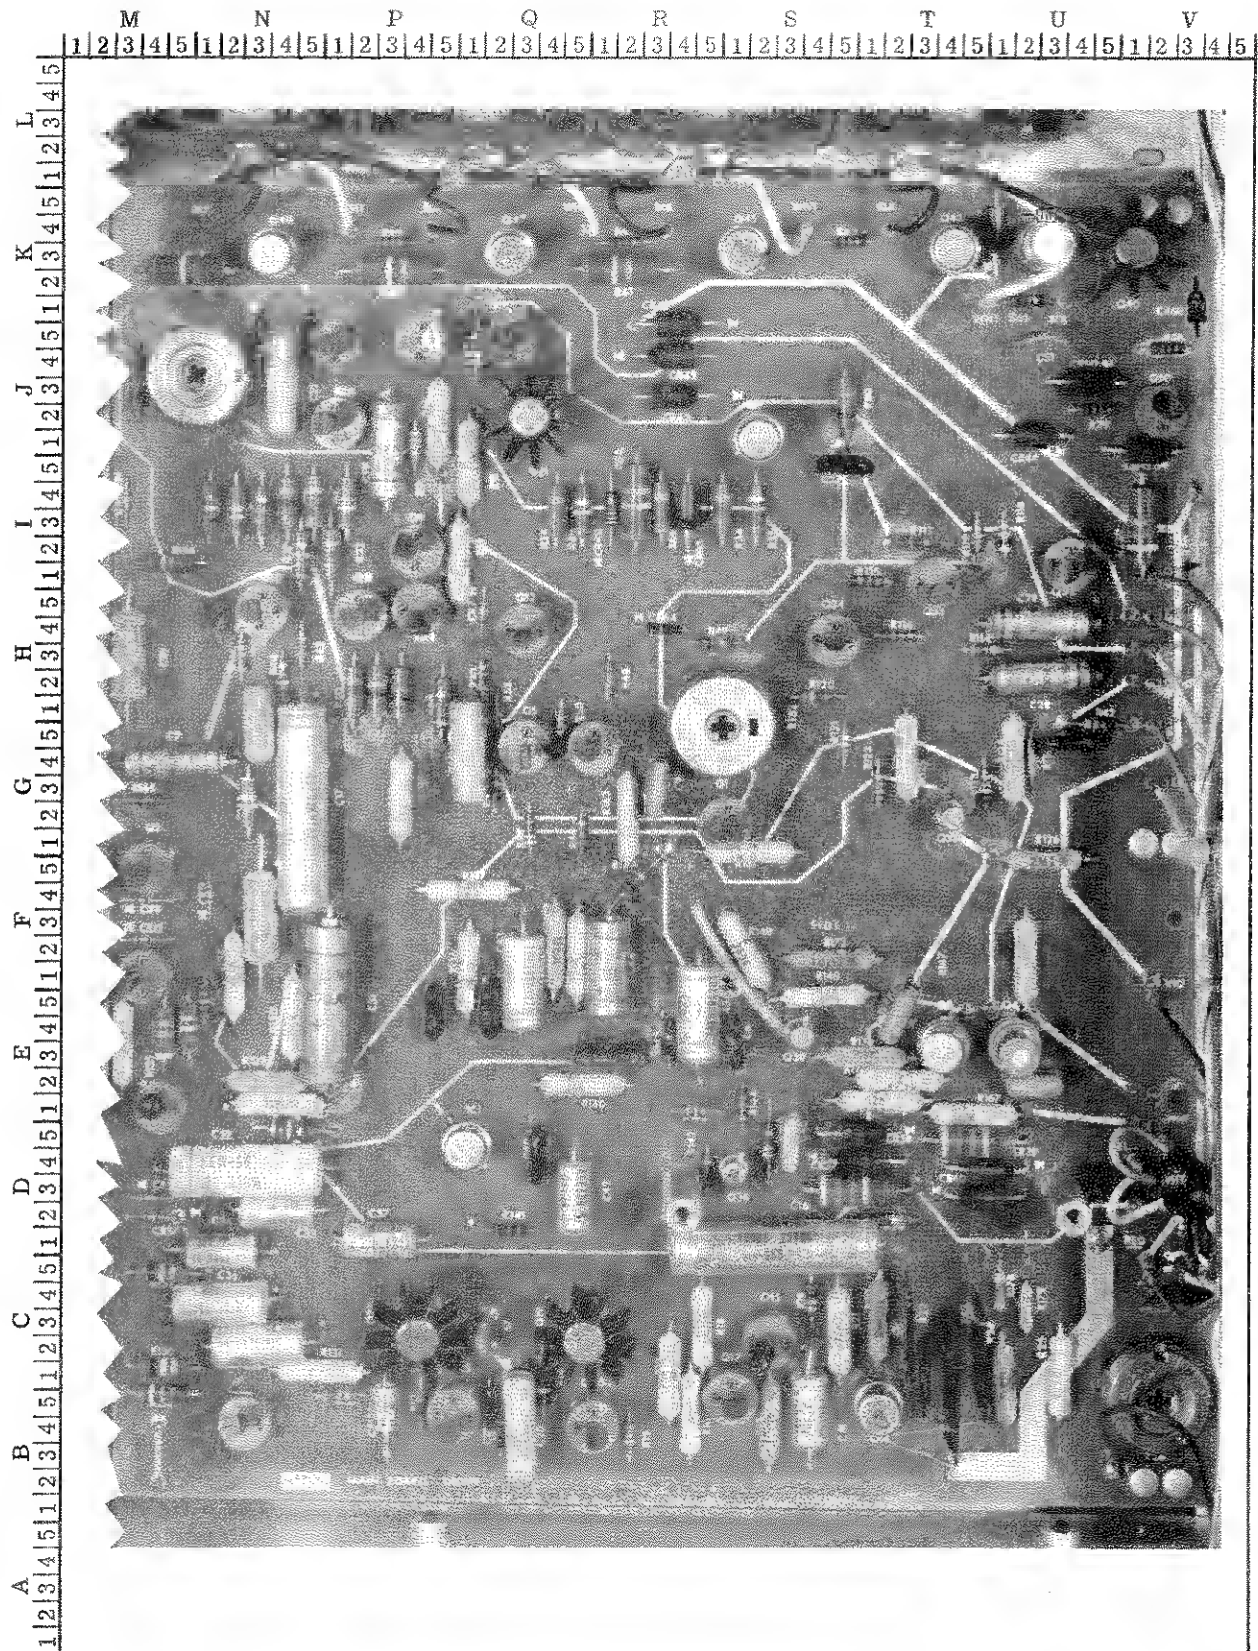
MAIN P/C ASSEMBLY (Right Hand Side)
